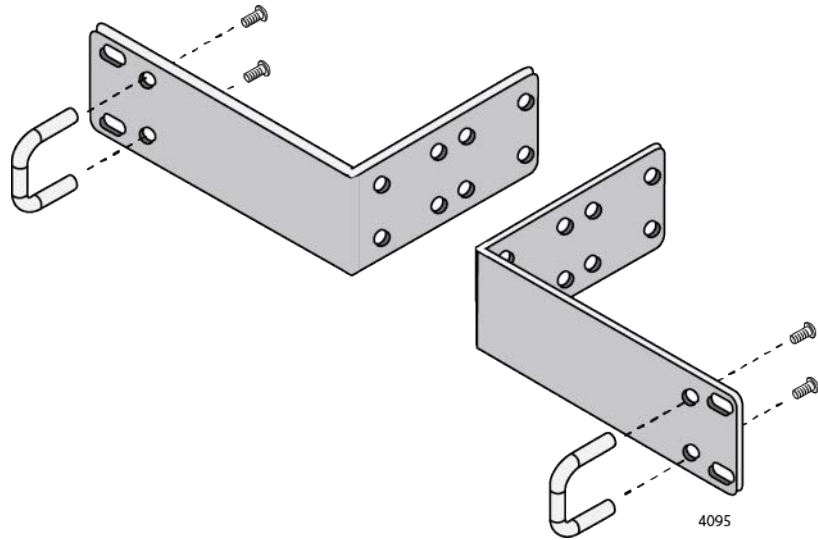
Attaching the Handles to the RKMT-J14 Brackets
